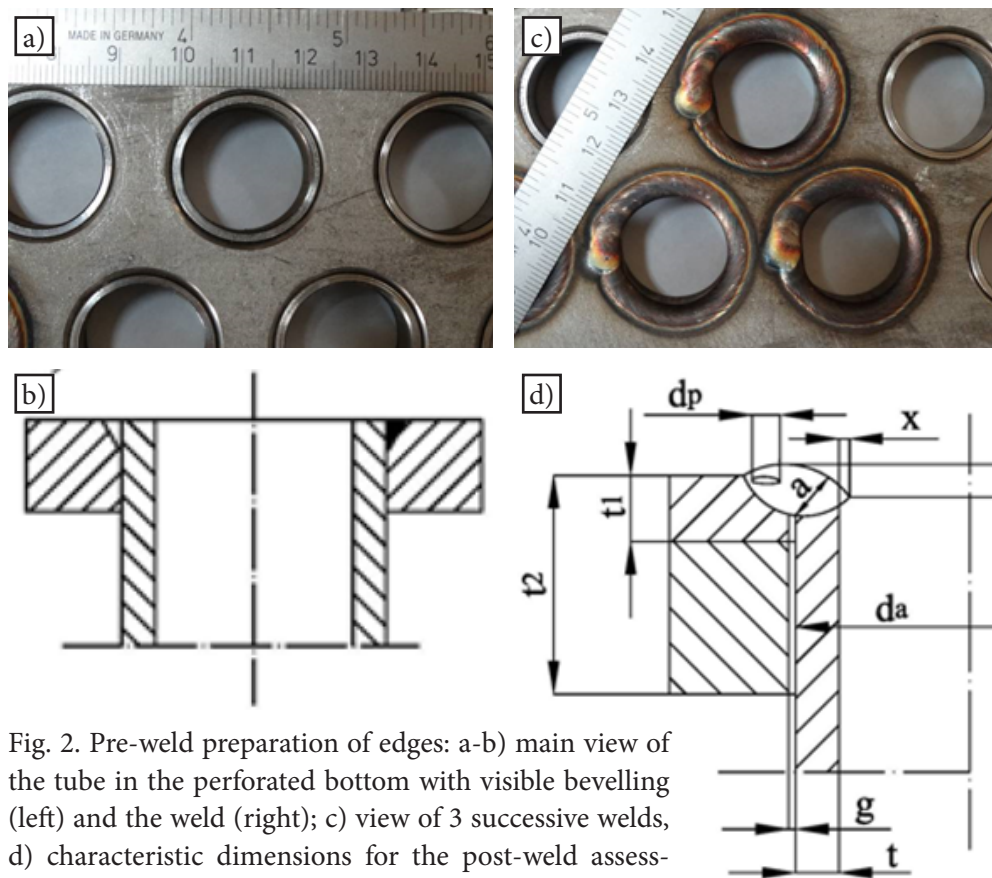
Pre-weld preparation of edges: a-b) main view of the tube in the perforated bottom with visible beveling (left) and the weld (right); c) view of 3 successive welds, d) characteristic dimensions for the post-weld assessment of the weld shape: t_1 – thickness of plated coating (if any), t_2 – thickness of the perforated plate, t – thickness of the tube, d_a – internal diameter of the tube, g – gap between the tube and the perforated plate, a – weld thickness, d_p – gas pore size, x – overlap
